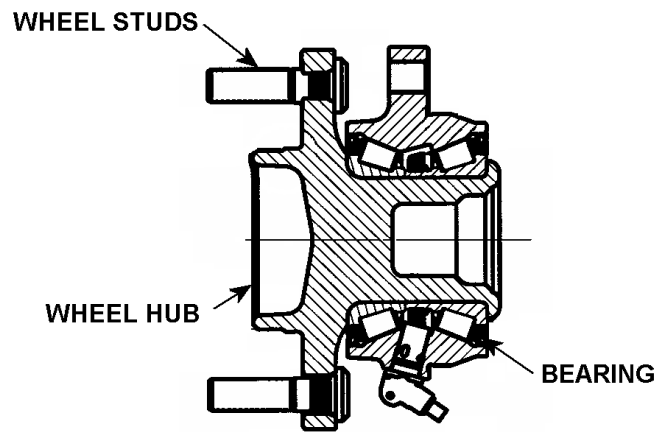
Integrated Bearing/Wheel Hub Assembly
